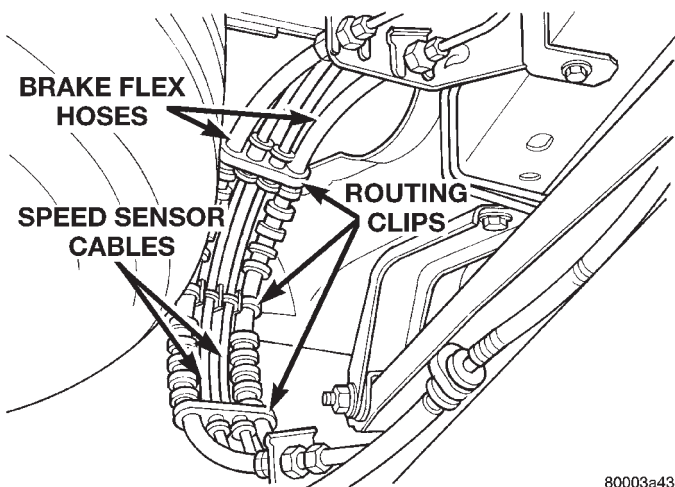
Speed Sensor Cable Attachment To Brake Flex Hose
